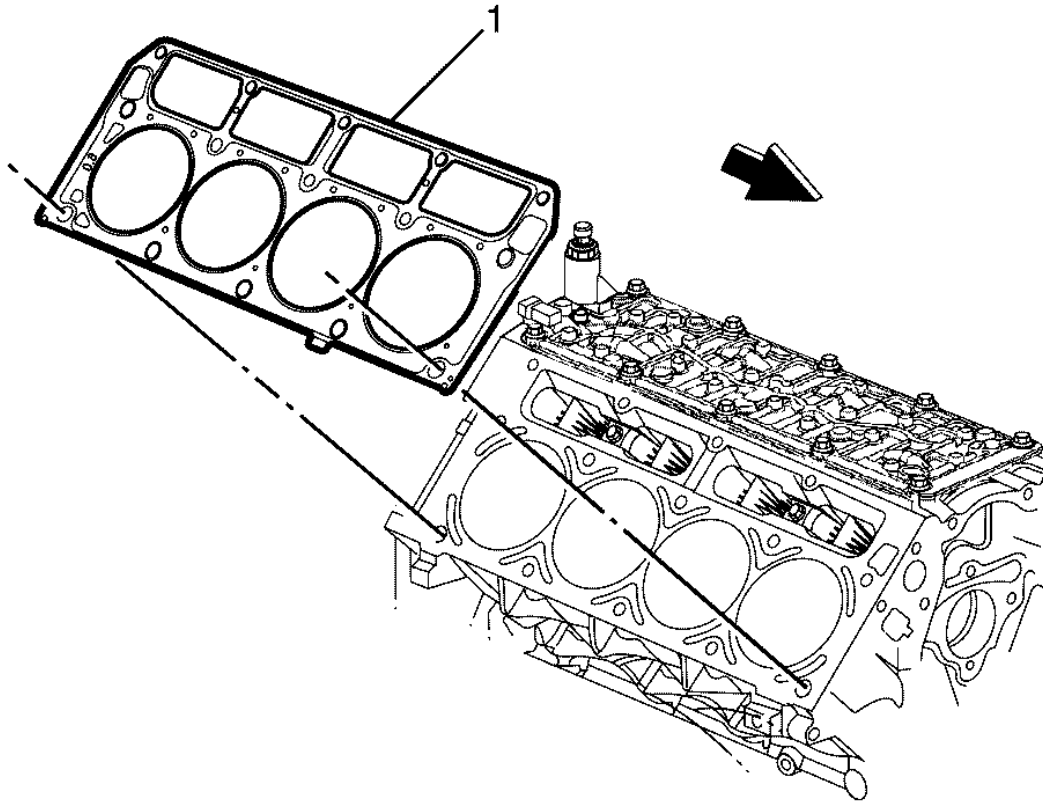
Identifying Cylinder Head Gasket (Right Side)
